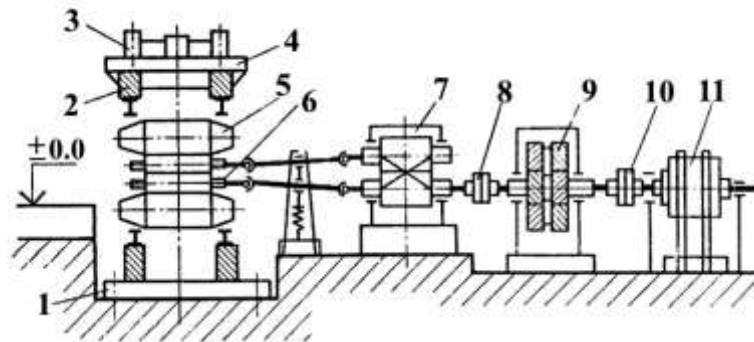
Scheme of a mill: 1-bed of roll stand; 2-4-pressing device; 5,6-support and working rolls; 7-pinion stand; 8,10-clutch; 9-reduction gear; 11- electrical motor
